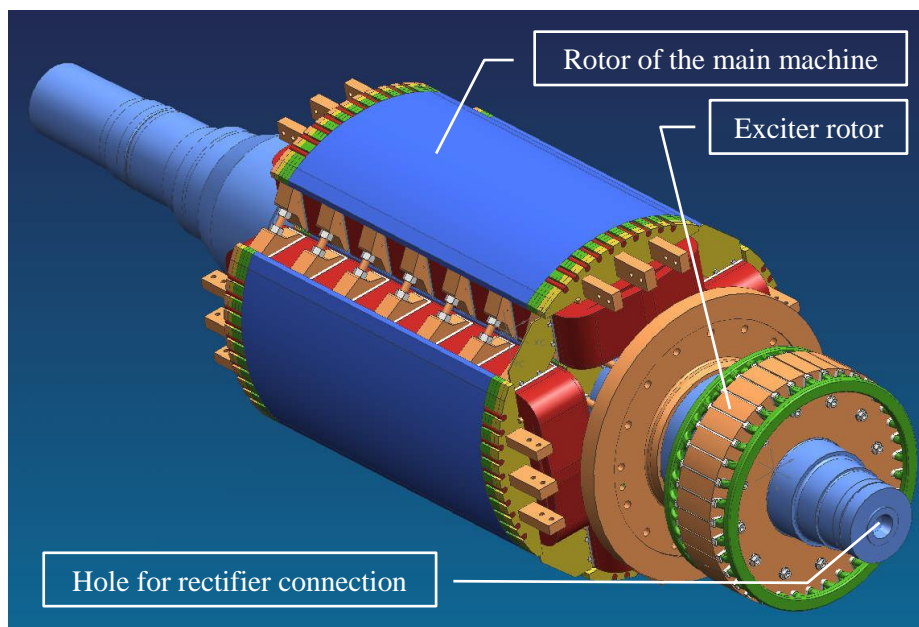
Exciter rotor located on common shaft with the rotor of main machine [1]
